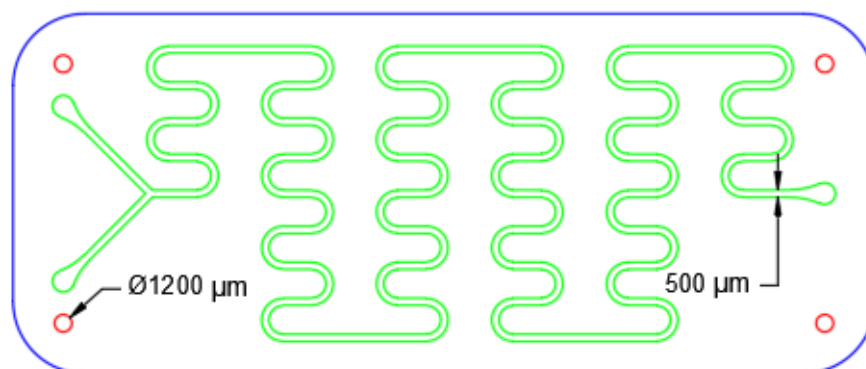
CAD design of middle layer (two inlets-one outlet)
